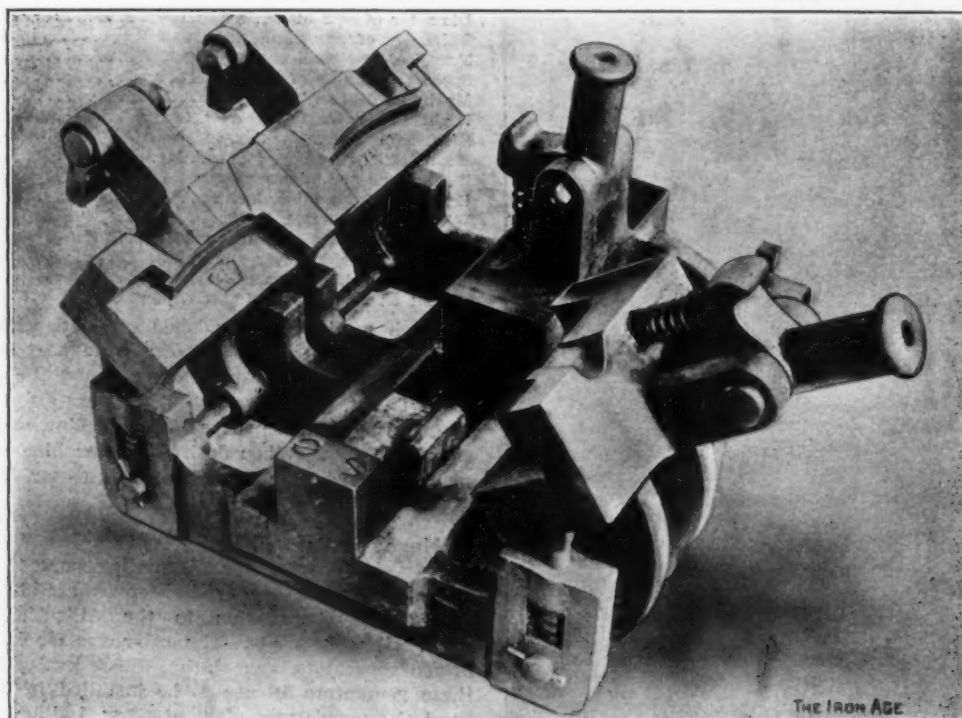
Iron Molds for Keystone Brake Shoe.
